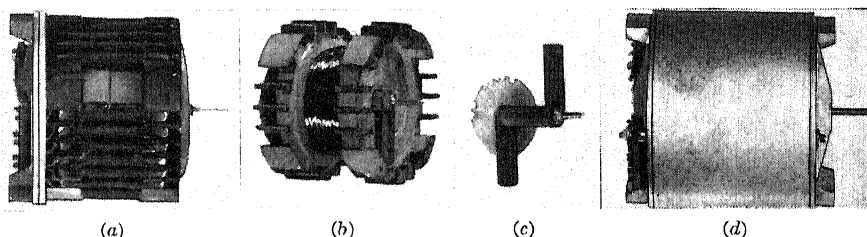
Kollsman Telegon and disassembled parts. (a) Unit removed from case; (b) stator windings removed, showing "rotor" winding and vane; (c) vane; (d) assembled Telegon.
